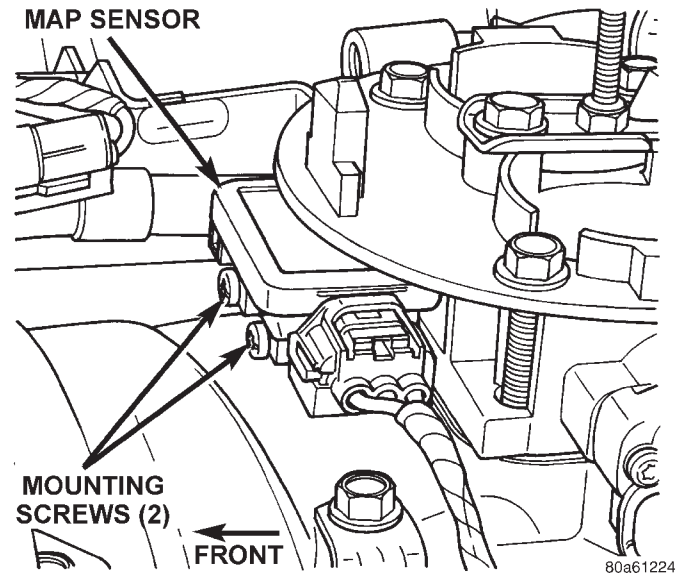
MAP Sensor Mounting Screws—5.2L/5.9L Engines
